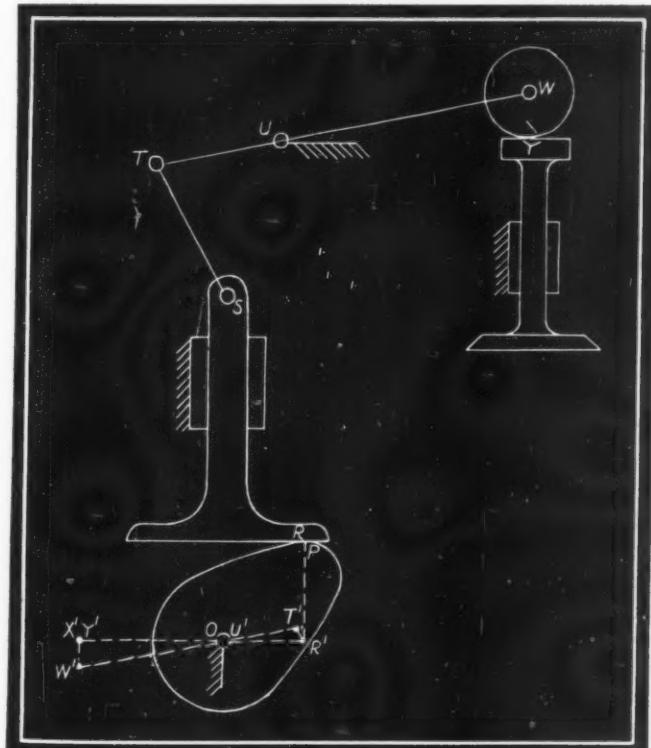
Diesel engine valve gear link, inclined excessively to clarify photograph locations
